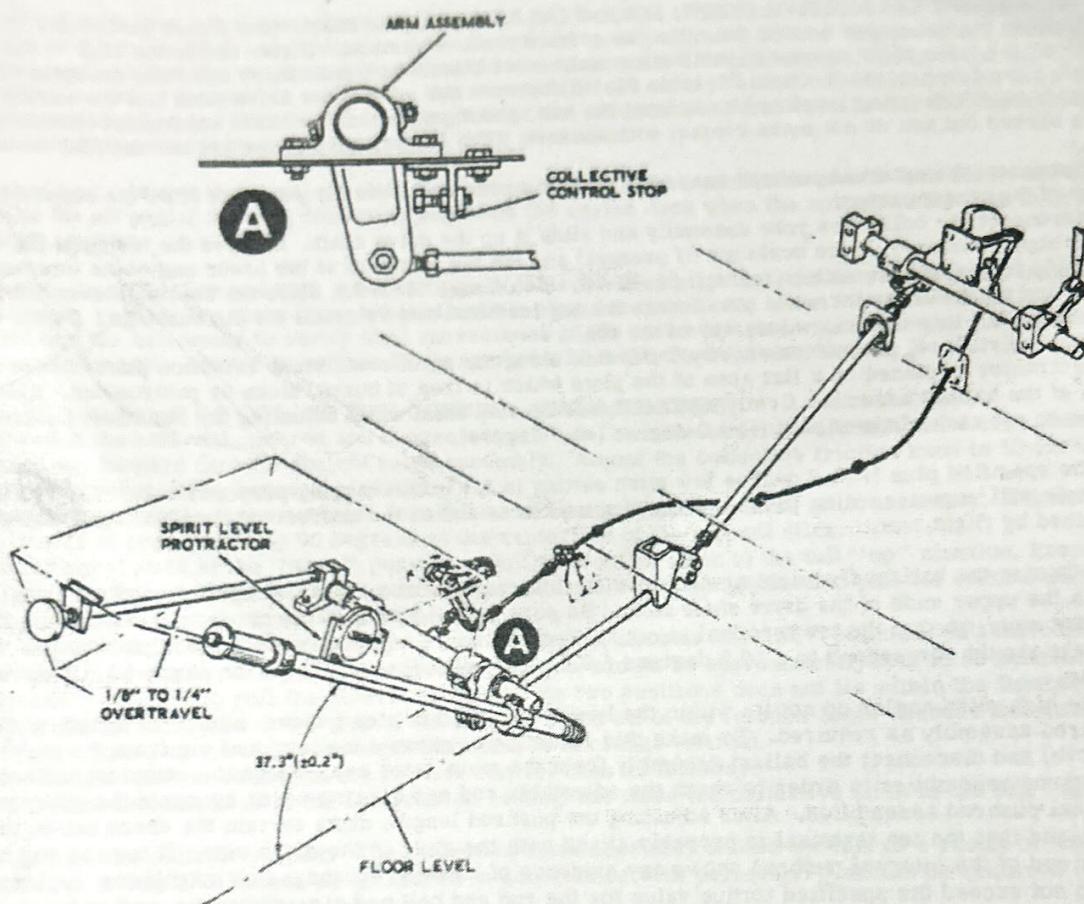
Collective Control Stick Adjustments, Four-Place Configuration
